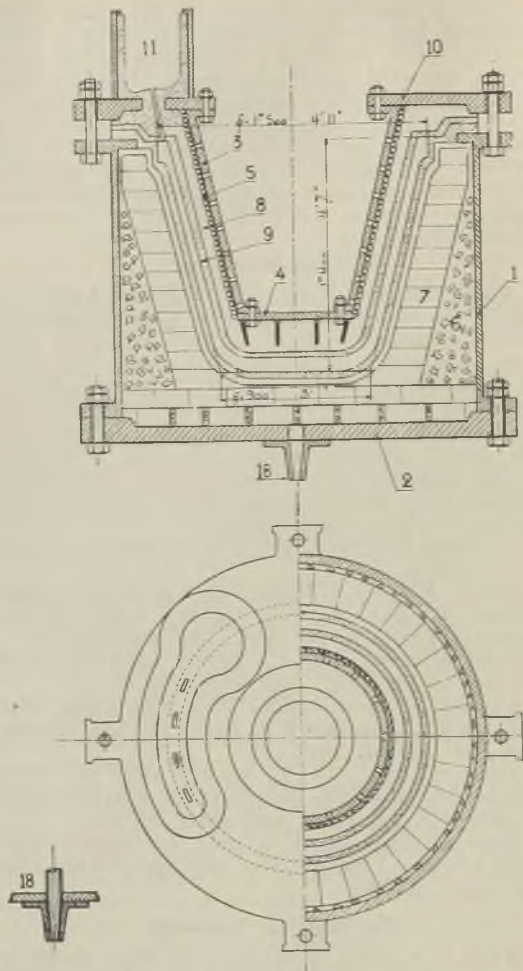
PLAN AND SECTION OF A LOAM MOULD FOR A SLAG LADLE.
